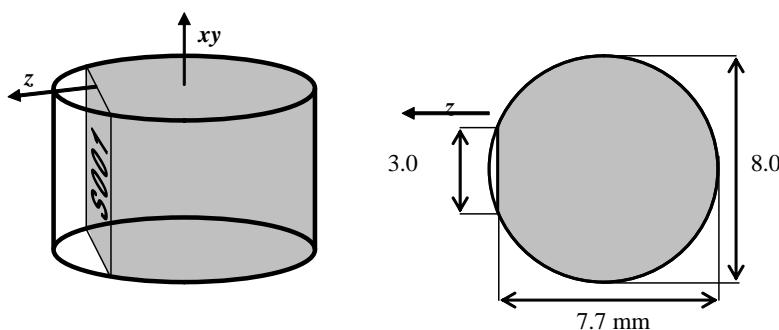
Flattening of the specimens. The figure on the left-hand side exaggeratedly shows the flattening of the cylinder. The figure on the right-hand side is a top-view of the specimen
